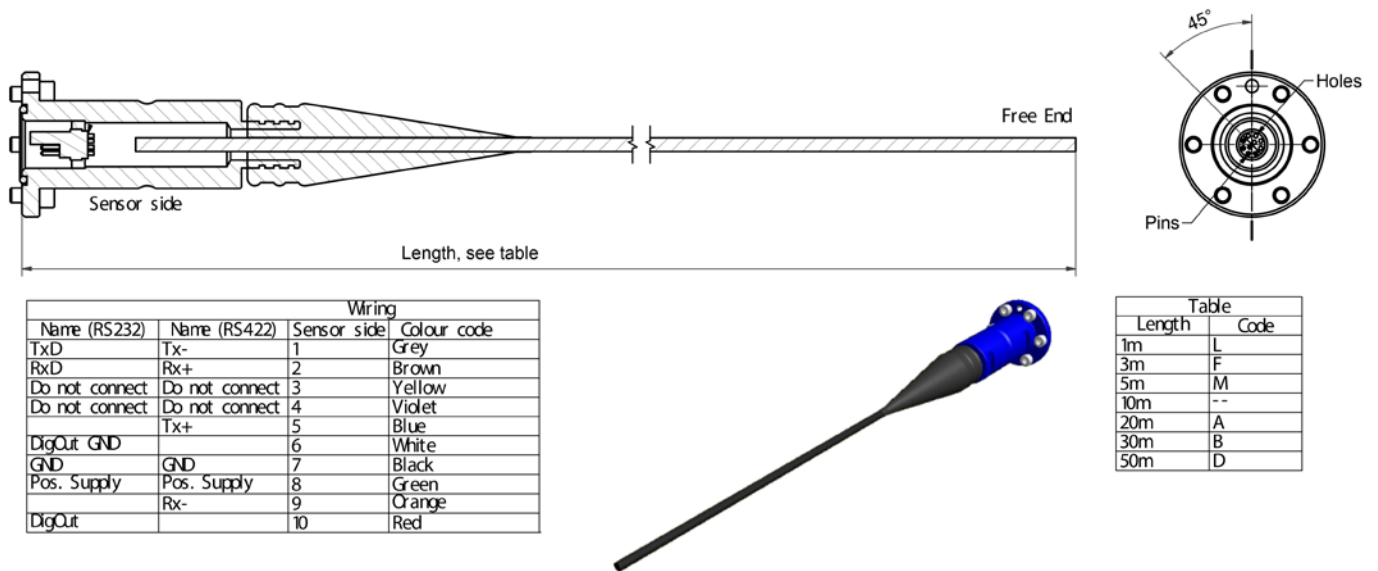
Drawing Free end Cable 5282, RS-232/RS-422 without twisted pair, max 50 meter.
